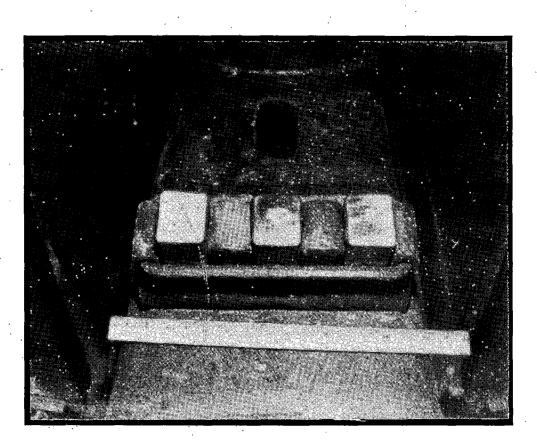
Fuel Car Constant Contact Side Bearing Arrangement
